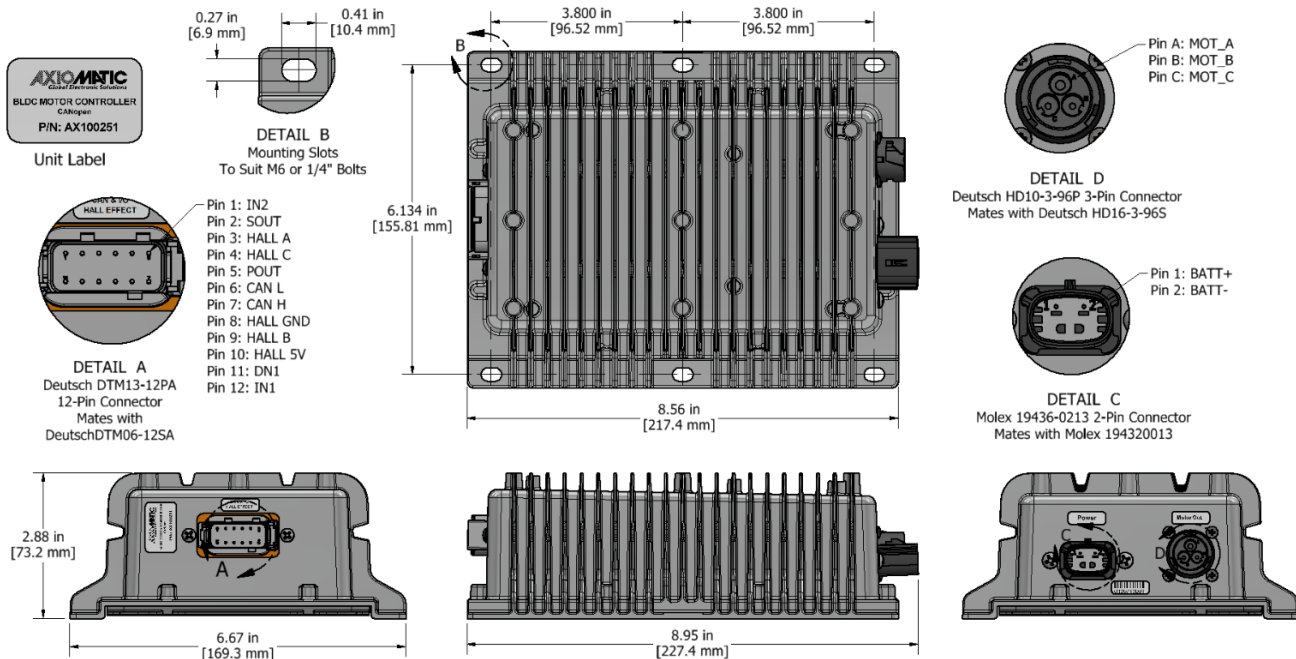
Dimensional Drawing (dimensions of AX100251A are same as those of AX100251)
